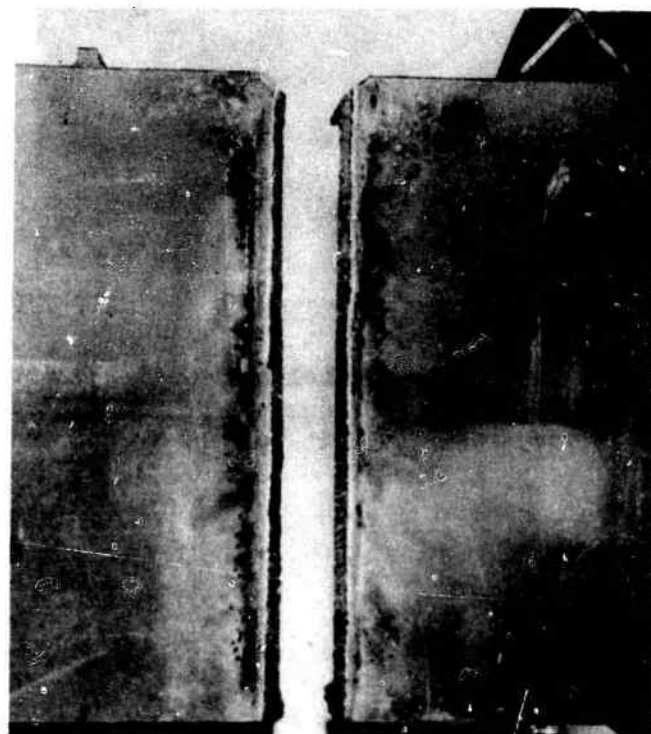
CUT IN FRAME, PRIMARY UNIT
